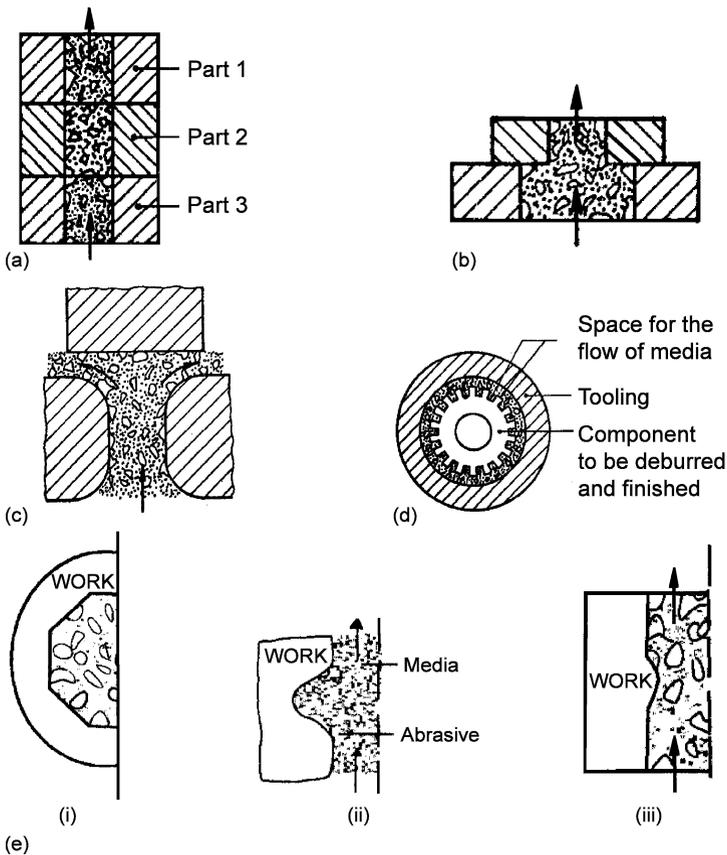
(a) Finishing of multiple parts having the same configuration. (b) Finishing of two parts but with different configurations. (c) Finishing and radiusing of an internal hole. (d) Tool for deburring and finishing of a gear using the AFM process. (e) medium acting as a self-deformable stone in the case of a complex, convex and concave component [1]
